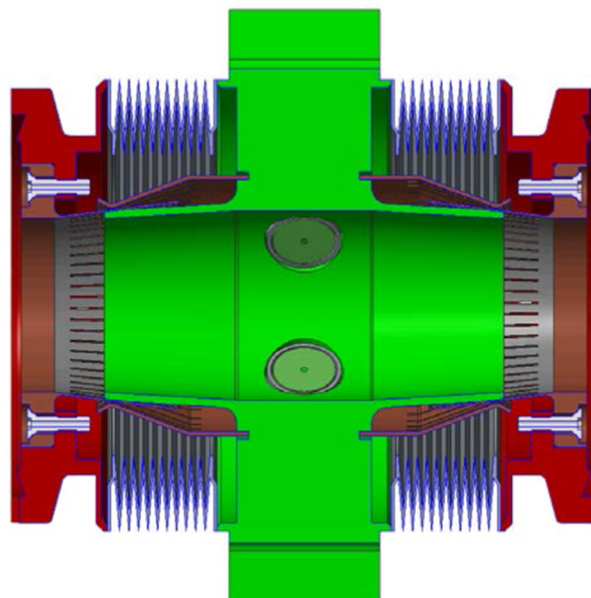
Cross section of compact BPM housing design with BPM buttons, GlidCop fingers, and two bellows all welded to a central stainless steel housing.
